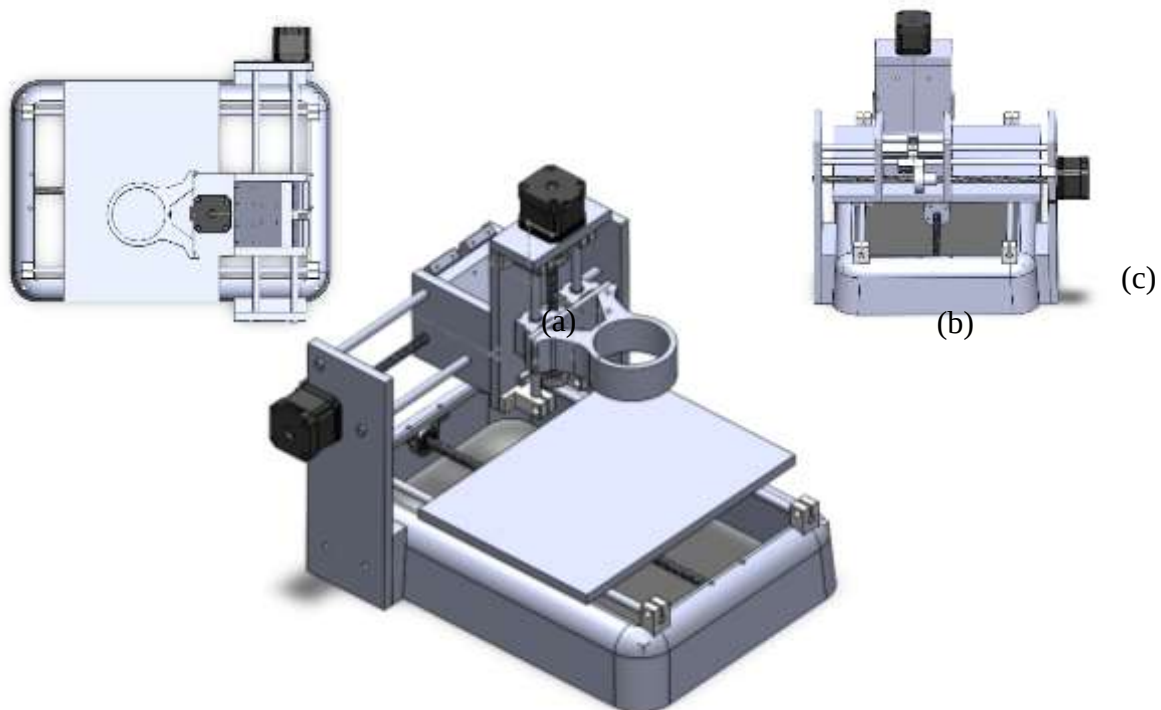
3D assemble of the 3D printing system, (a) Top view of 3D printer, (b) Back view of 3D printer and (c) Perspective view of 3D printer
